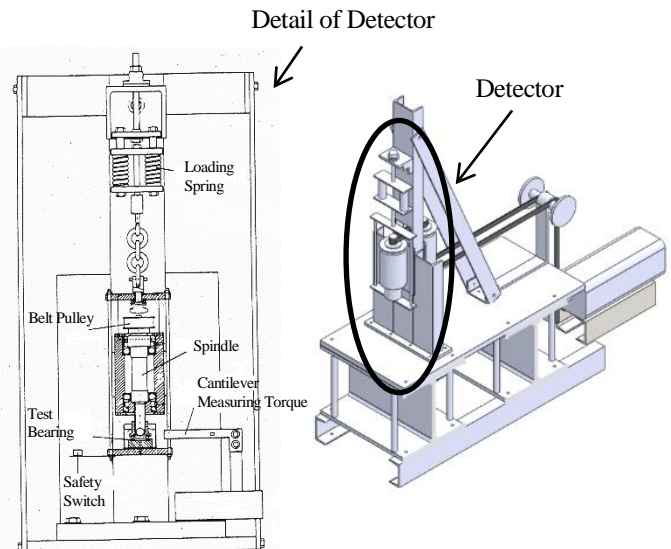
Detector for Evaluating Fatigue Life of Thrust Ball Bearing
